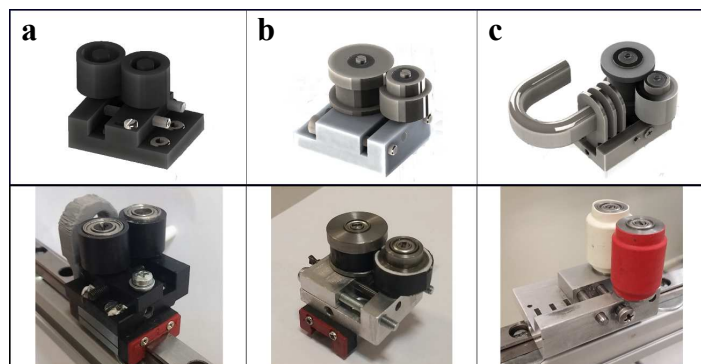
Design iterations of the pinch-roller drive where (a) is the first, (b) is the second and (c) is the final prototype.
